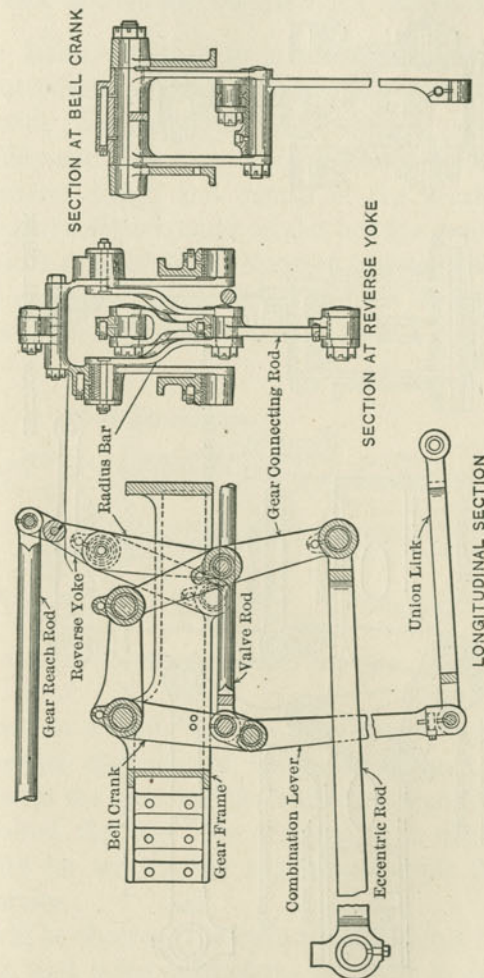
Details of Baker Locomotive Valve-gear for Outside Admission
